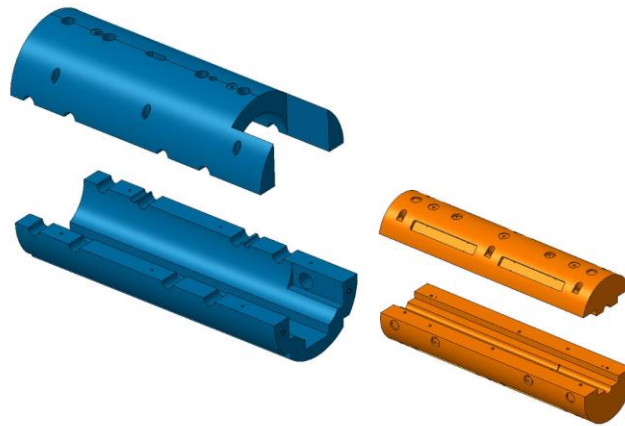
Exploded view of the ATLAS TAXS (orange) and its surrounding cradle (blue)
